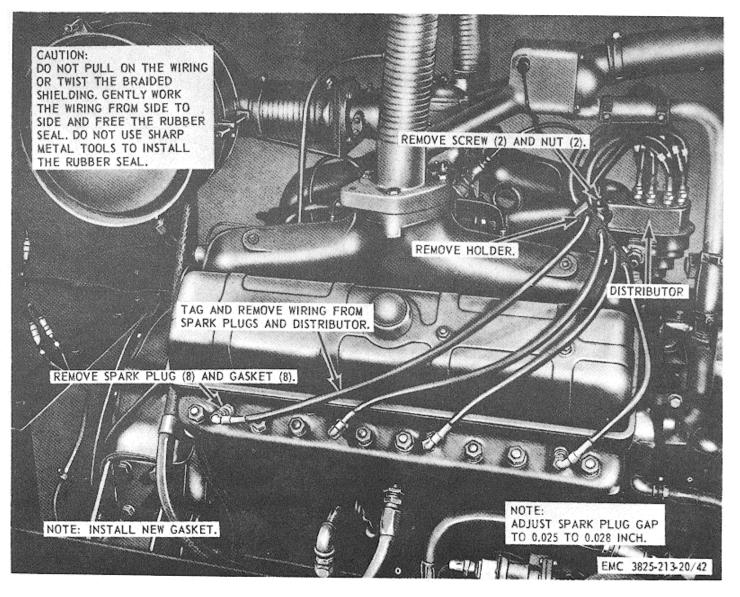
Plow and carrier engine spark plugs and wiring, removal, installation, and adjustment.
